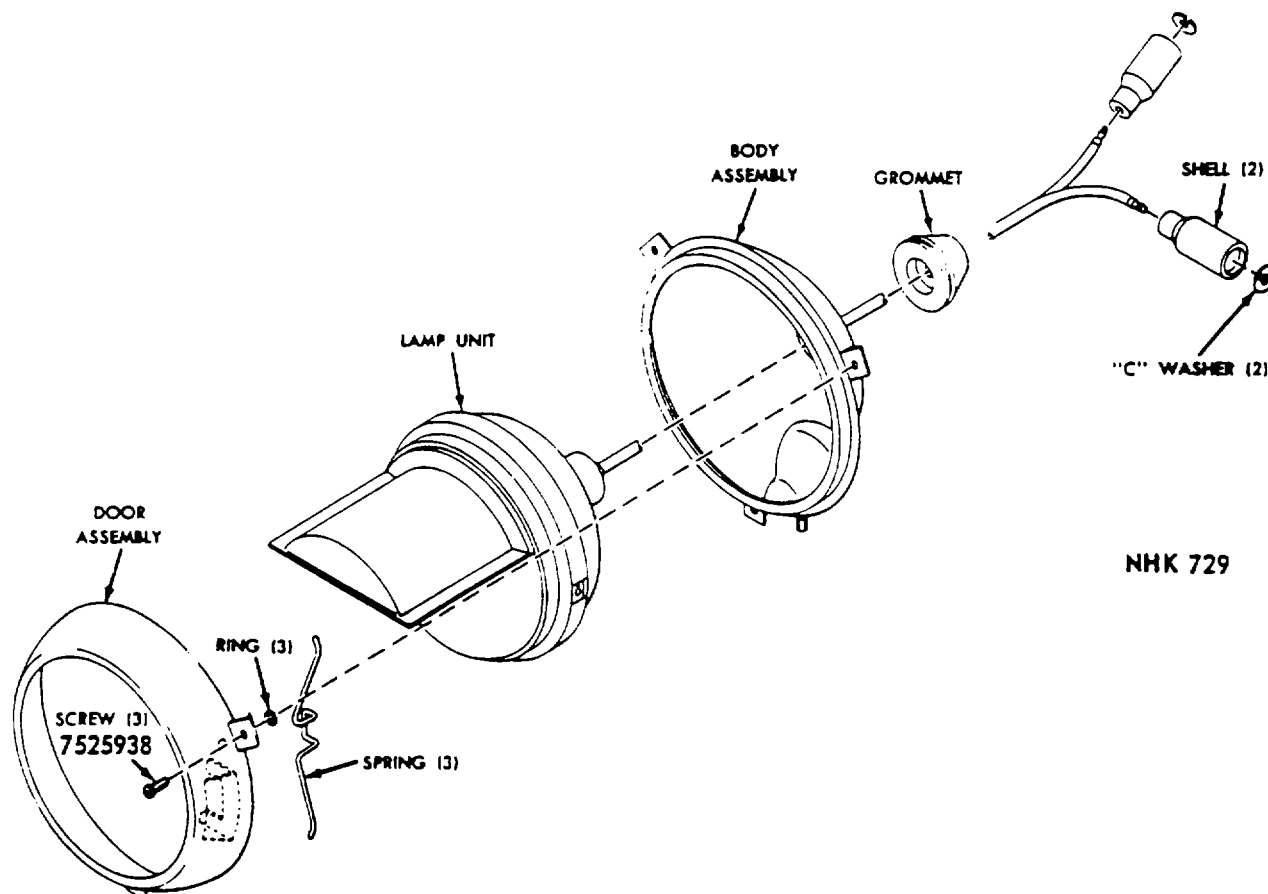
Disassembly of Blackout Headlamp Assembly.
